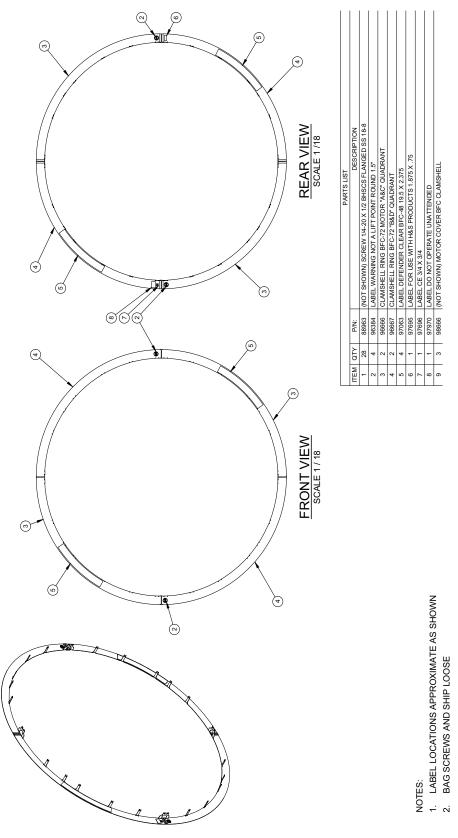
BCF-72 DEFENDER GUARD KIT ASSEMBLY (P/N 97223)
